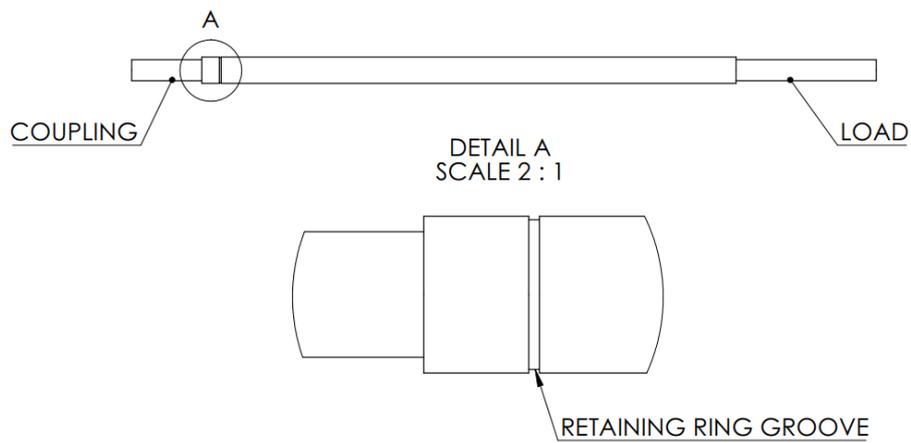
Engineering drawing of shaft designed for 6002 bearing.
